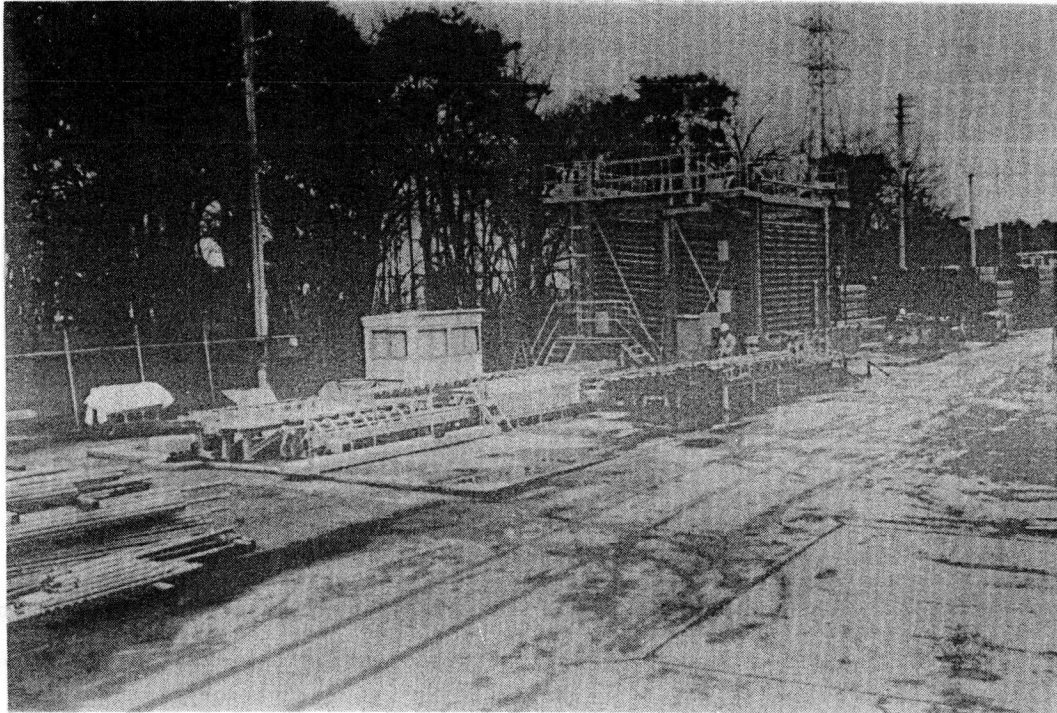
Exterior view of the automatic steel pipe inspection and acceptance system
